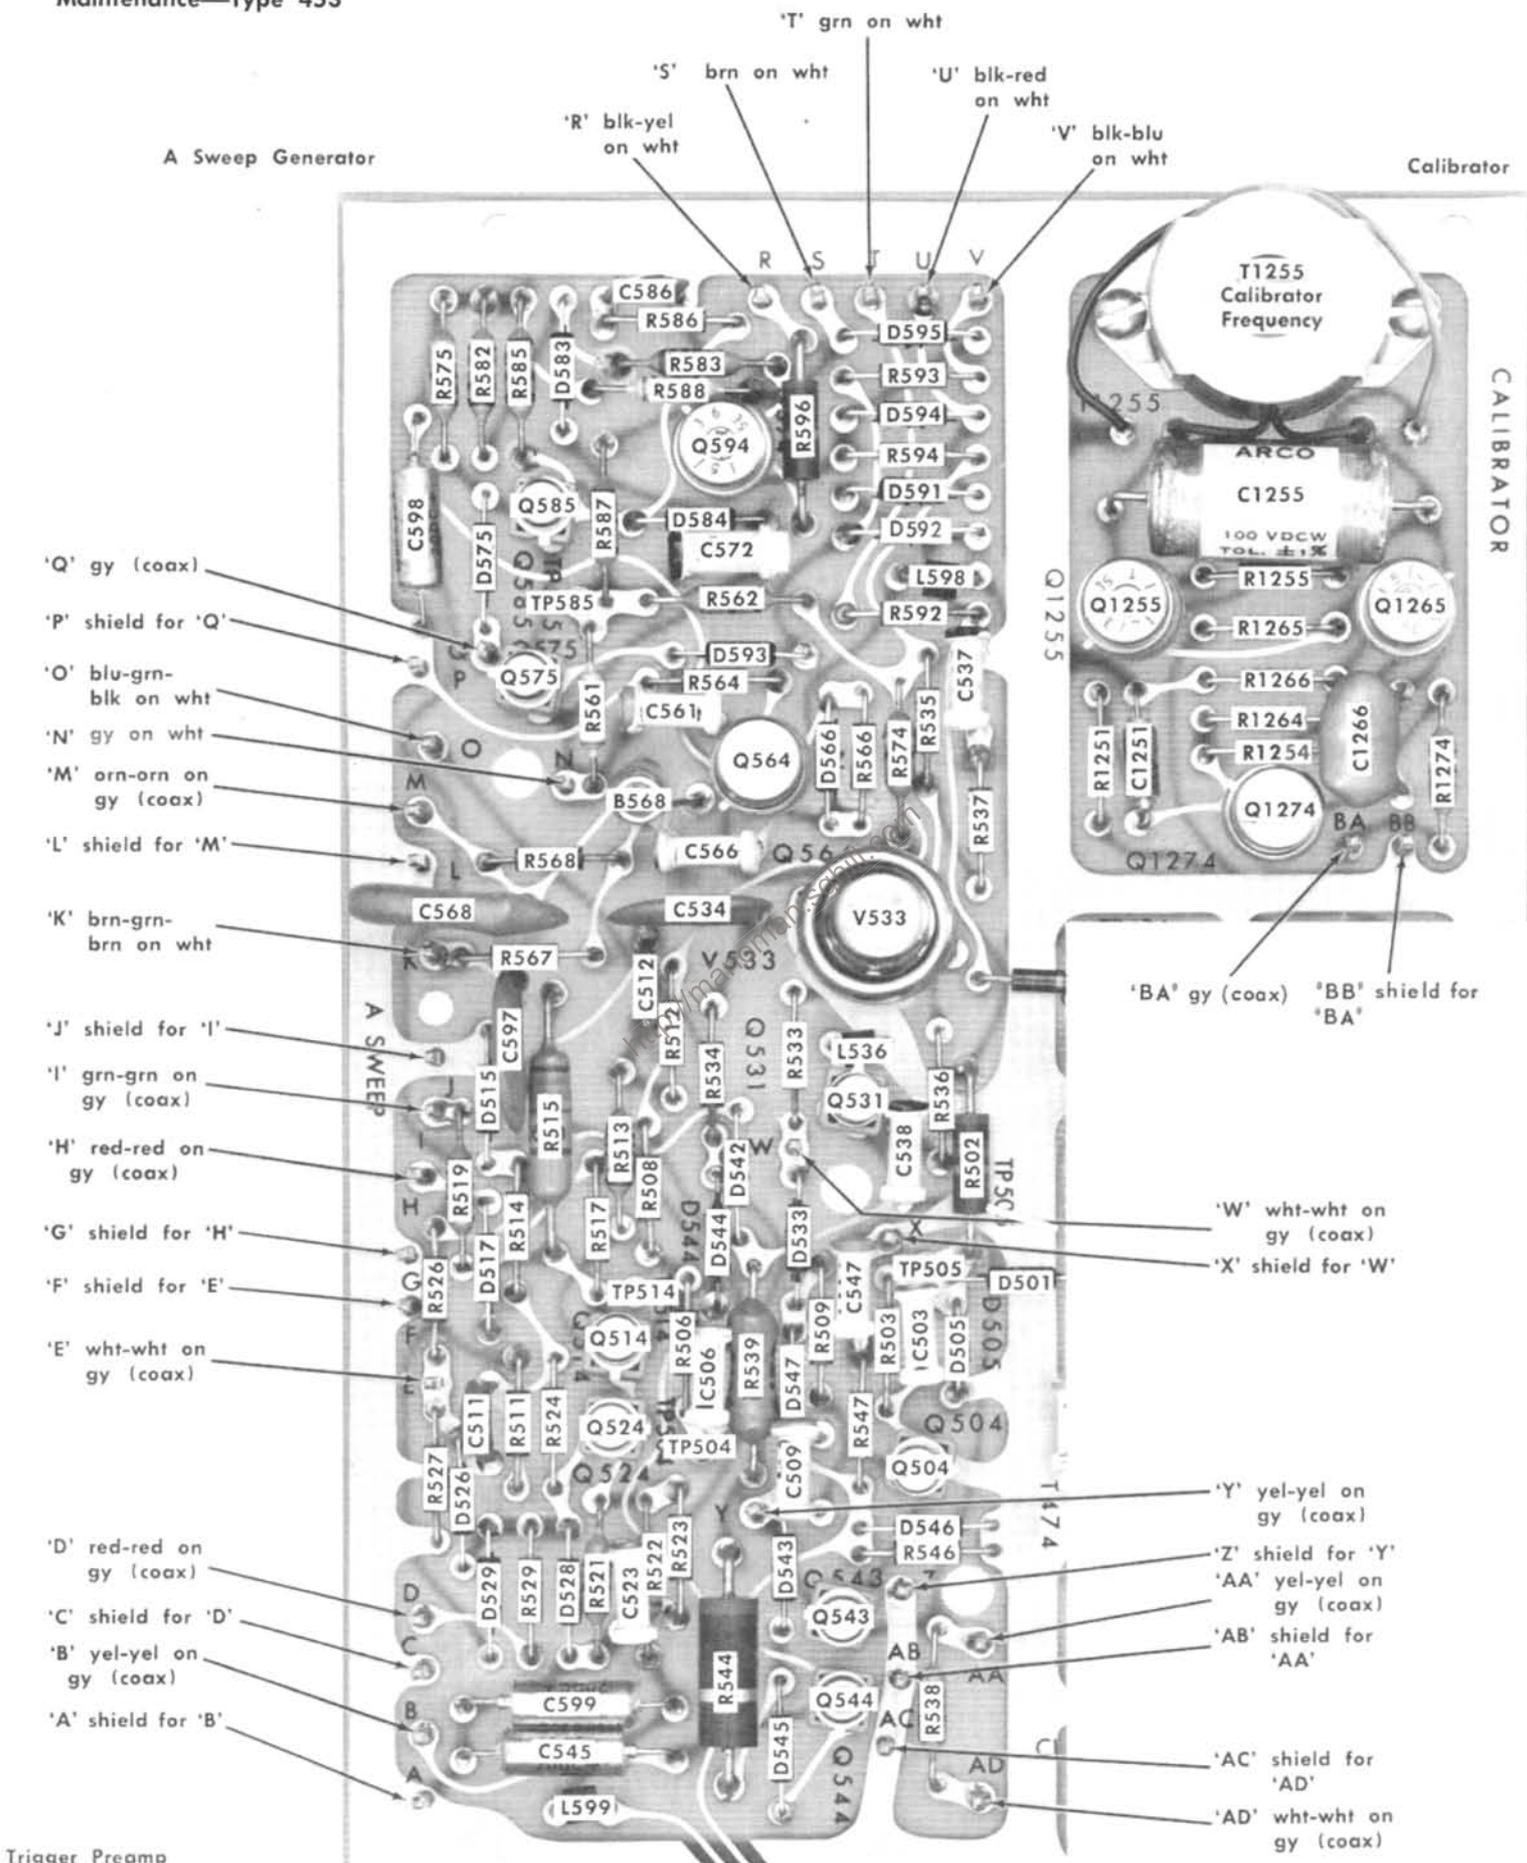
A Sweep Generator and Calibrator etched-wiring board (partial A Sweep board).
